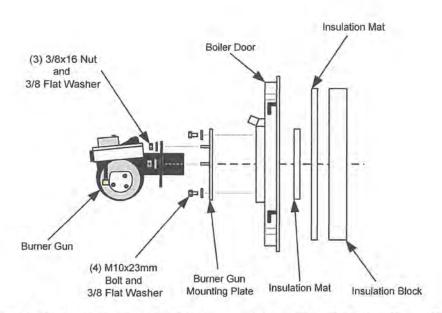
WB-25, WB-35 and WB-50 Burner Mounting & Boiler Door Detail
